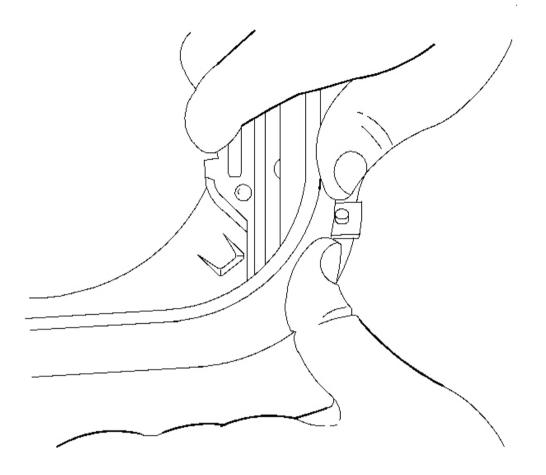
Pushing Left Front Side Of Air Deflector Towards The Right Courtesy of GENERAL MOTORS CORP.
